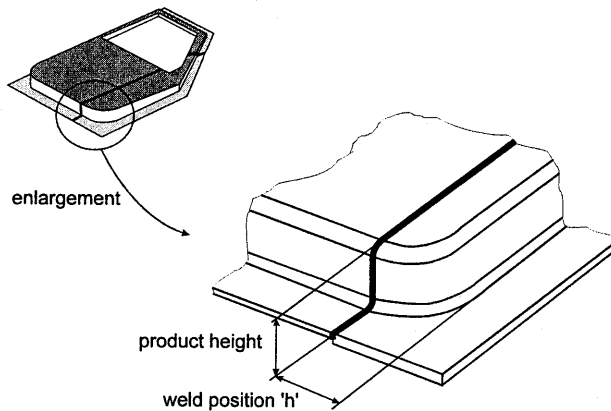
The weld position 'h' in an inner-door and enlargement of the corner radius
